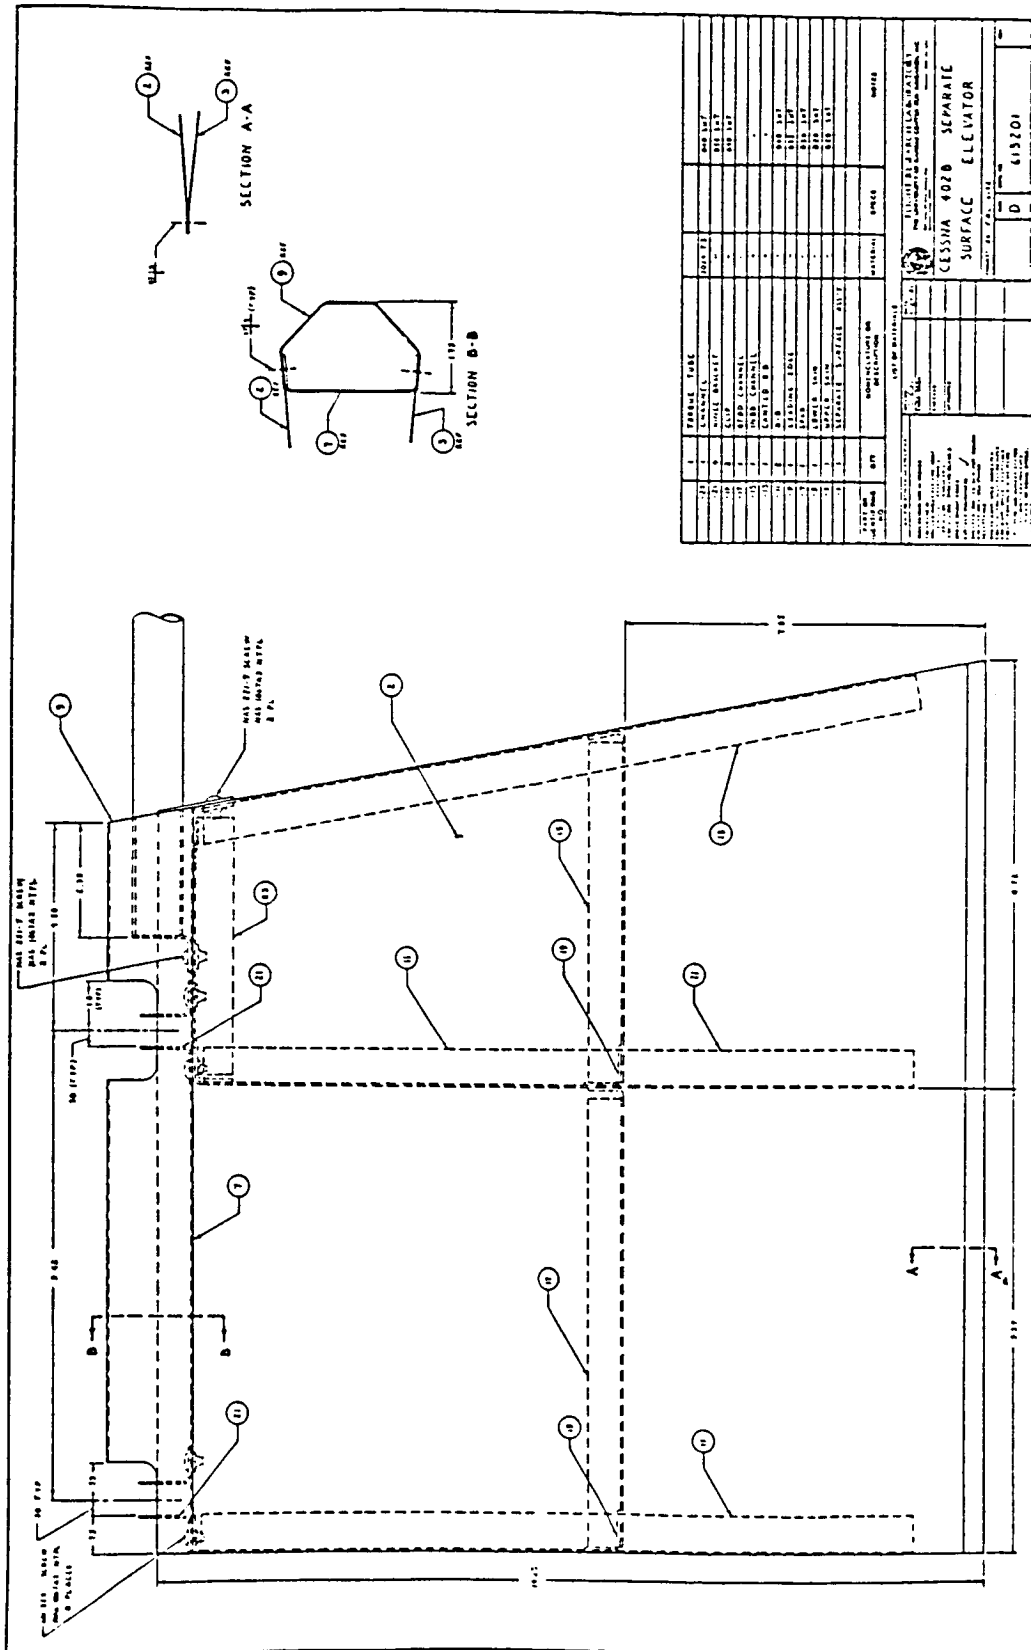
Preliminary Structural Arrangement of the Left Separate Surface Elevator Section
